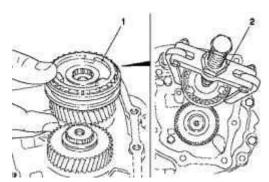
Removing the gear wheels, gear fifth gear and fifth gear synchronizer body with the main shaft: 1 - body synchronizer 2 - adaptation
